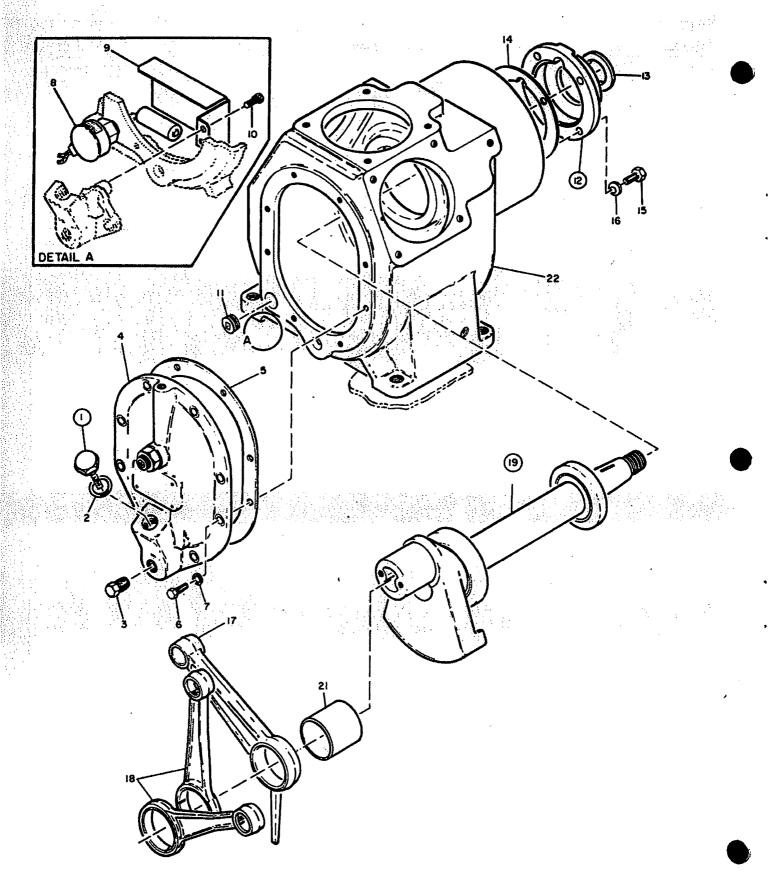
COMPRESSOR FRAME ASSEMBLY
